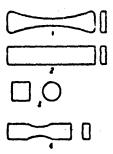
Shape of specimens for testing of cermets: 1) For tensile test; 2) for bending test; 3) for compression test; 4) for fatigue test.
